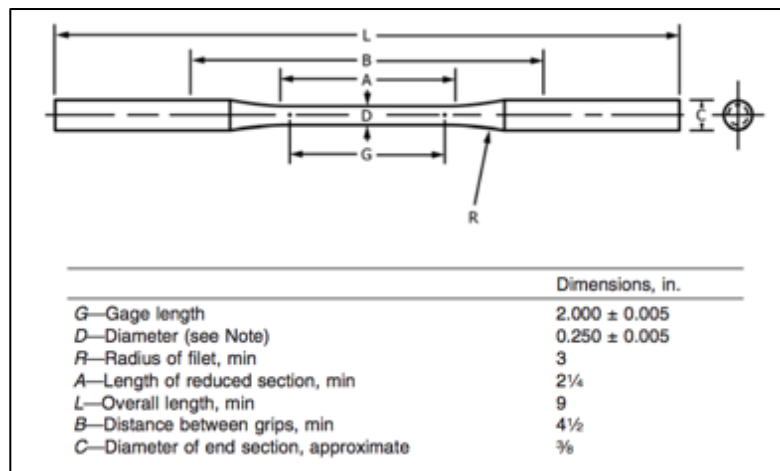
Standard cast-to-size tensile bar for die castings⁽¹⁸⁾
